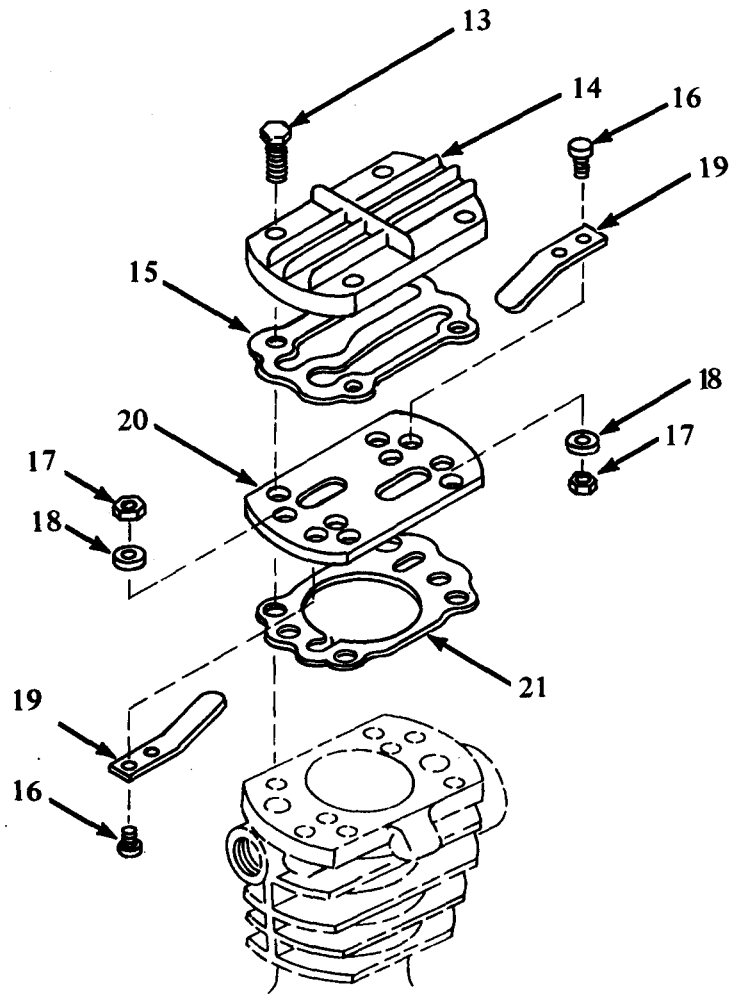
Cylinder Heads, Intake and Exhaust Valves (Sheet 2 of 2)
